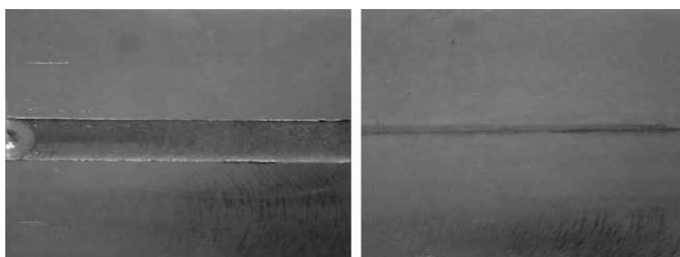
Photographic presentation of the face and reverse of welded joint
